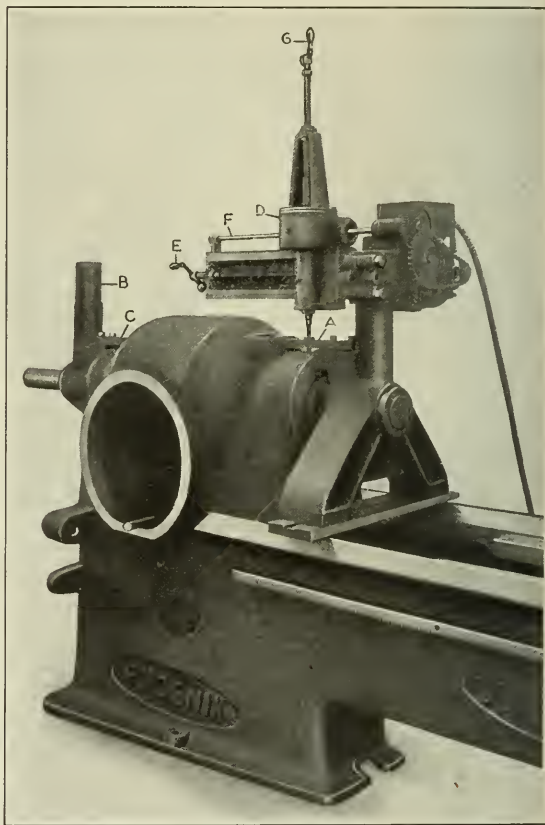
Portable Radial Drilling Machine engaged in drilling Holes for Oil Cups and Wedge Clamping Screws
